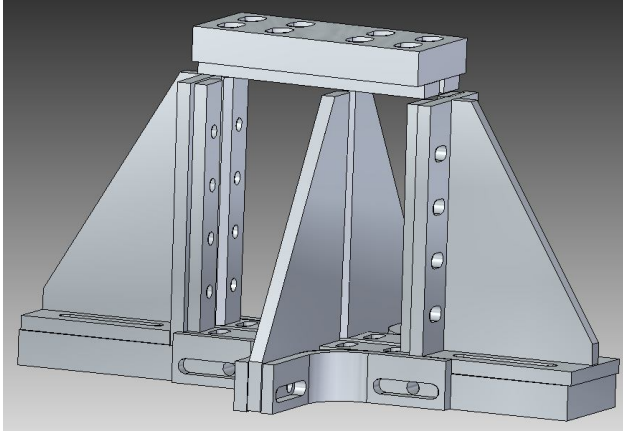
CAI test fixture. ε_x is applied vertically. The three vertical simple supports and two horizontal clamped supports match those shown in Fig. 2.
